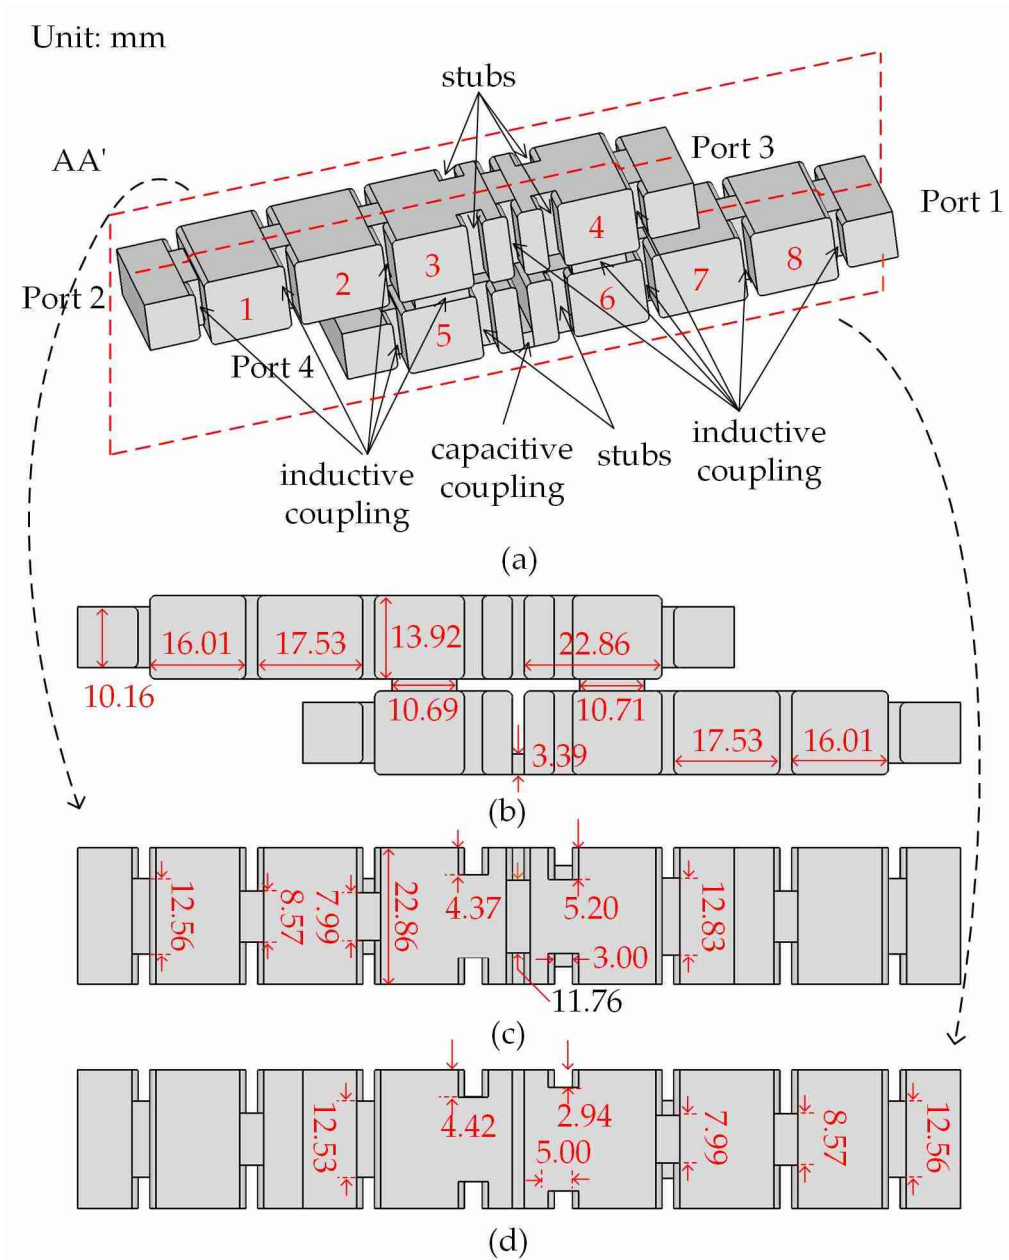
The fourth-order filtering coupler and its dimensions. (a) Overall view; (b) Front view; (c) Top view; (d) Bottom view.
